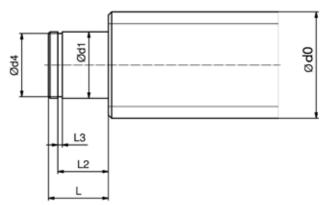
Dimension standard end machining for BSTF, BF and FF bearing units
